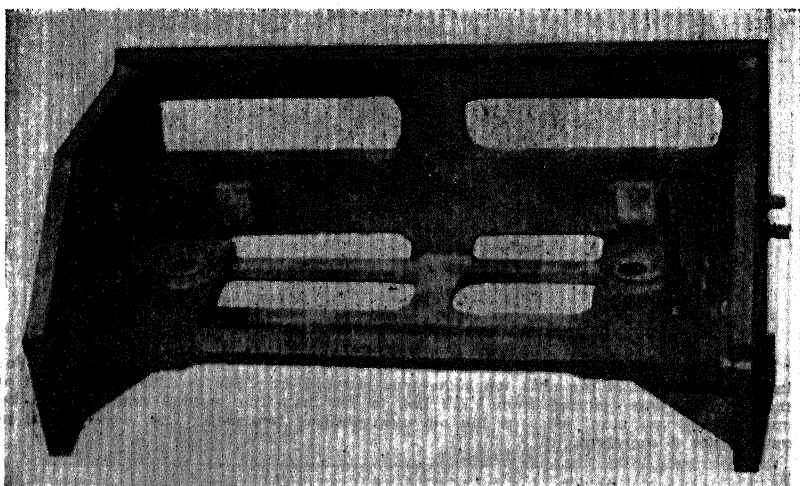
Welded drill jig for frame tie. Weighs 382 lbs. (434 lbs. cast), costs \$41.59 (\$65.12 cast), built in 25 hrs. (39 hrs. cast).
